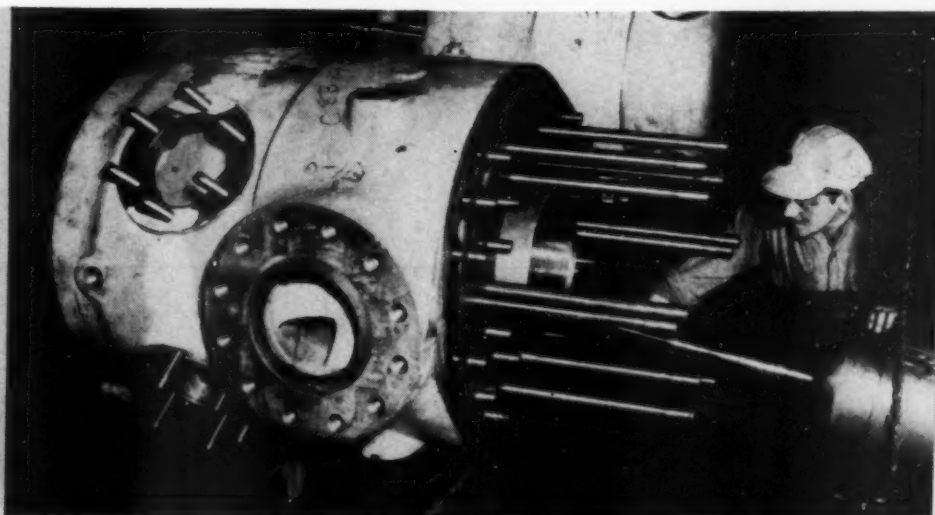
Rolls which provide drag on wheels of new cars during final tests are sprayed with a coating of steel to prevent wear. Former rolls lasted 3 months; the metallized ones, 4 years
